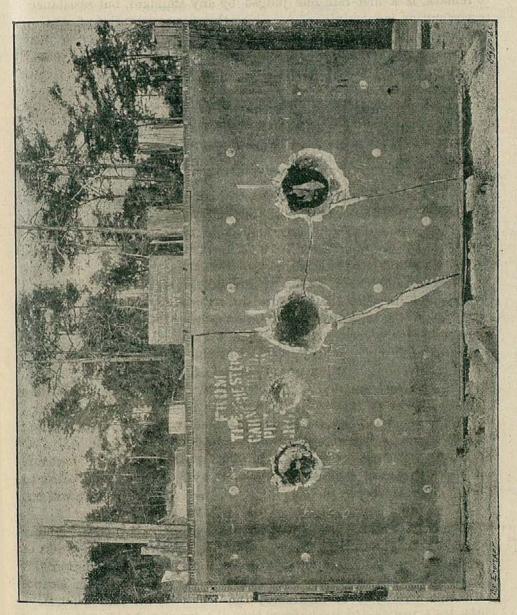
CARNEGIE DOUBLE FORGED PLATE.
